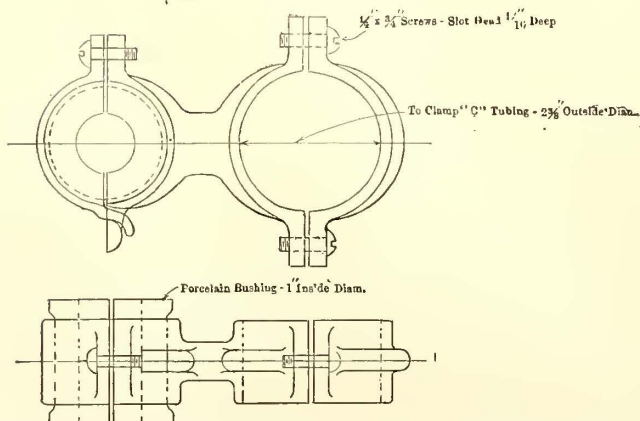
A—Method of Transposing Power Transmission Lines
